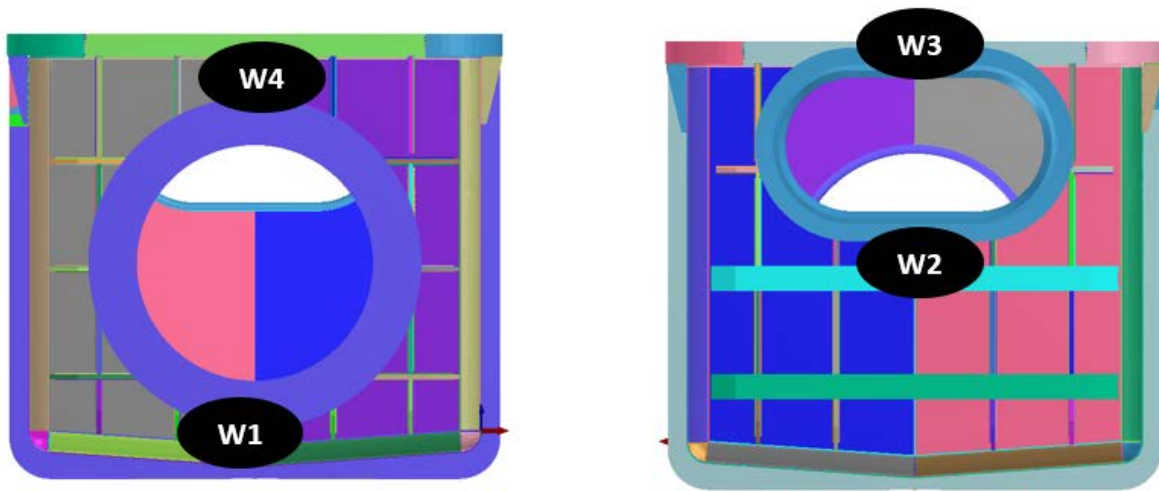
Welding configuration for HVB, FS and cryo flange
